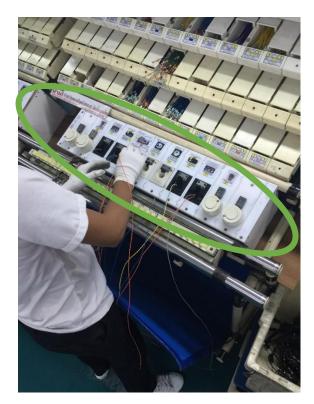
Installed Sliding Gutter at Wire Assembly Station
